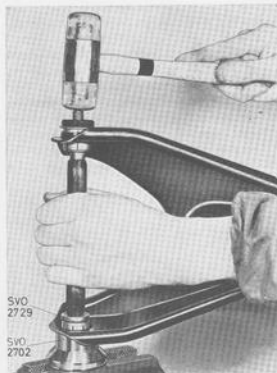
Removing control arm shaft. 2. Driving out shaft
